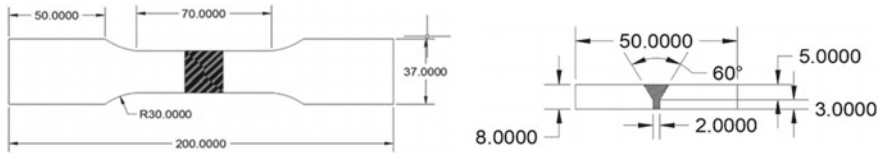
Tensile and impact test specimen (all dimensions in mm)
